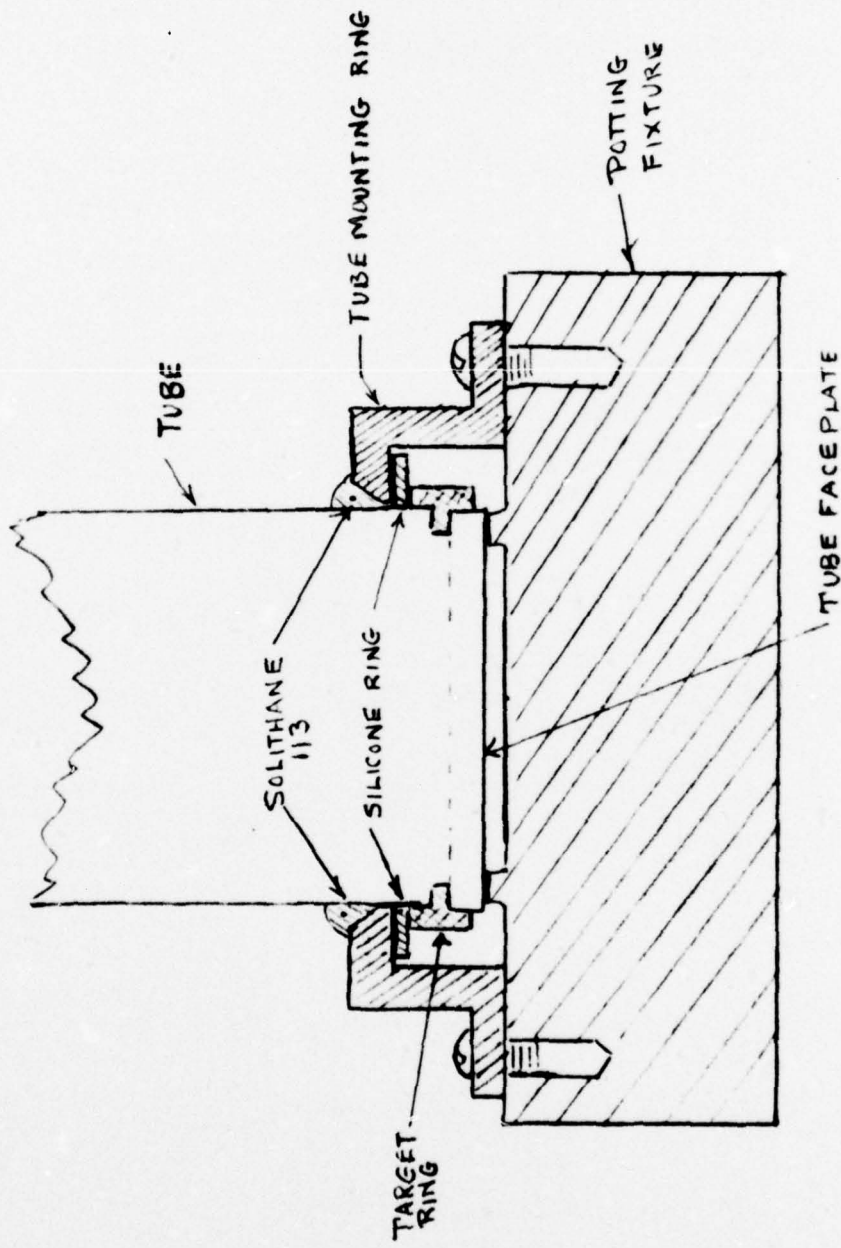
SETUP FOR BONDING MOUNTING RING TO TUBE
